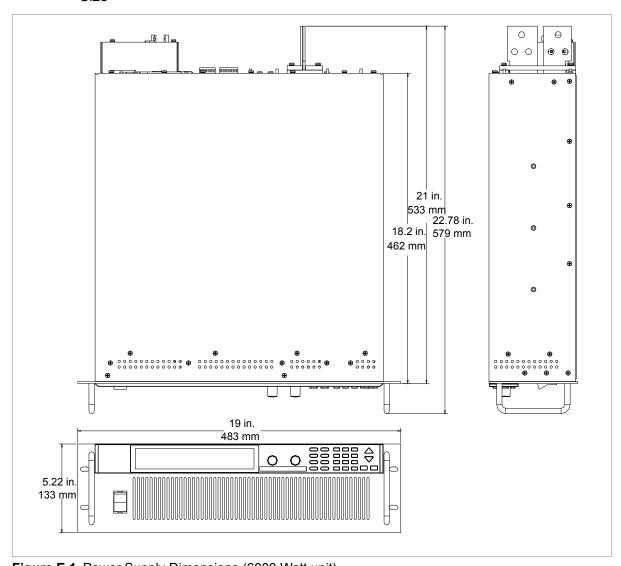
Power Supply Dimensions (6000 Watt unit)
